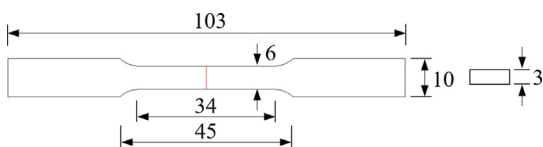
Dimensions of welded tensile coupons (dimensions in mm).
